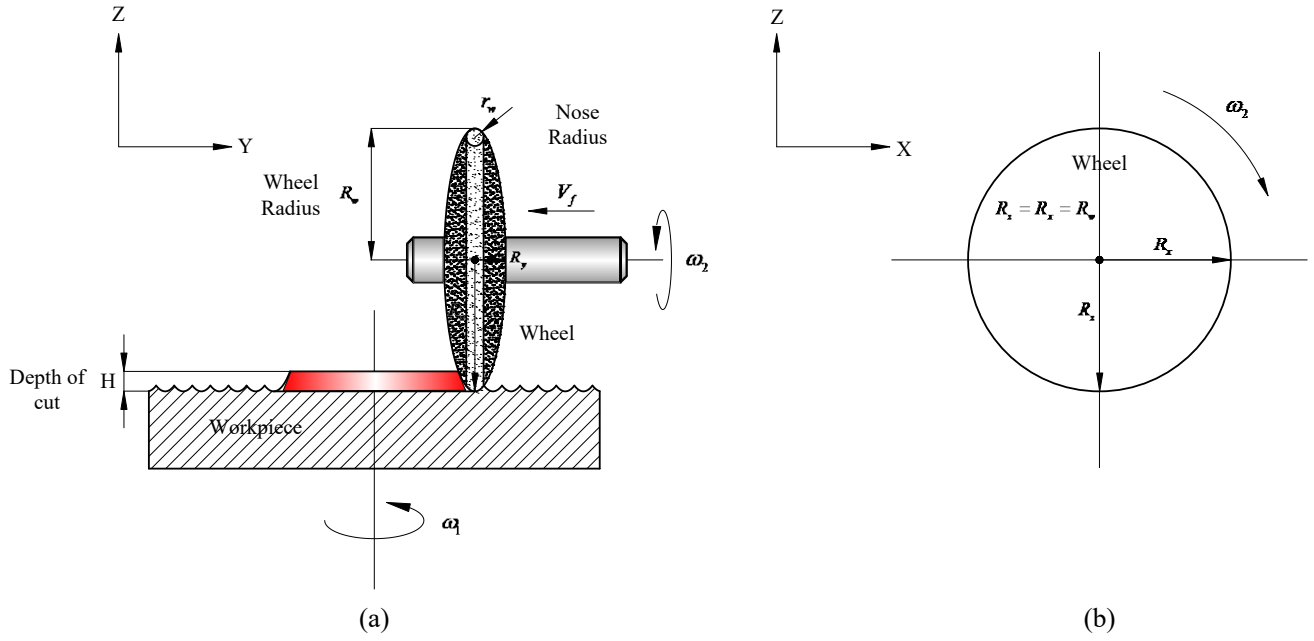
Graphical illustration of the grinding wheel: (a) Front view of the wheel (b) Side view of the wheel
